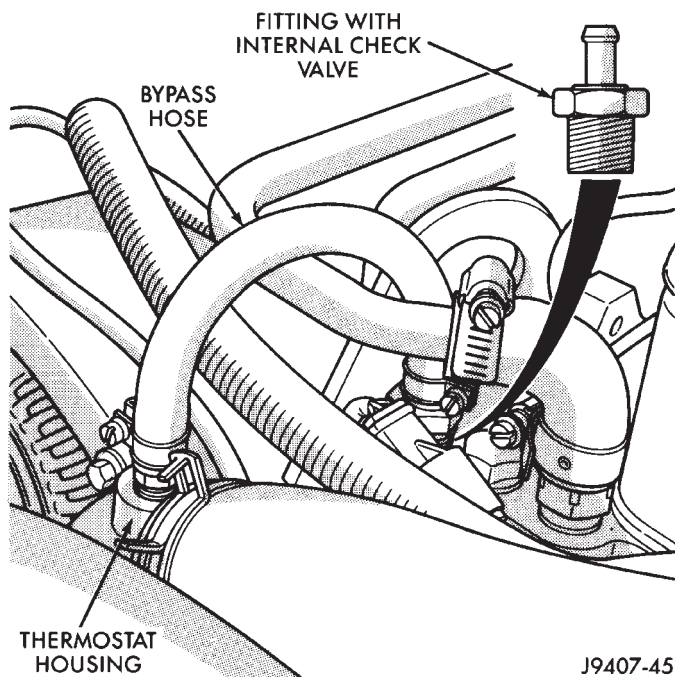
One-Way Check Valve (Jiggle Pin) Location
